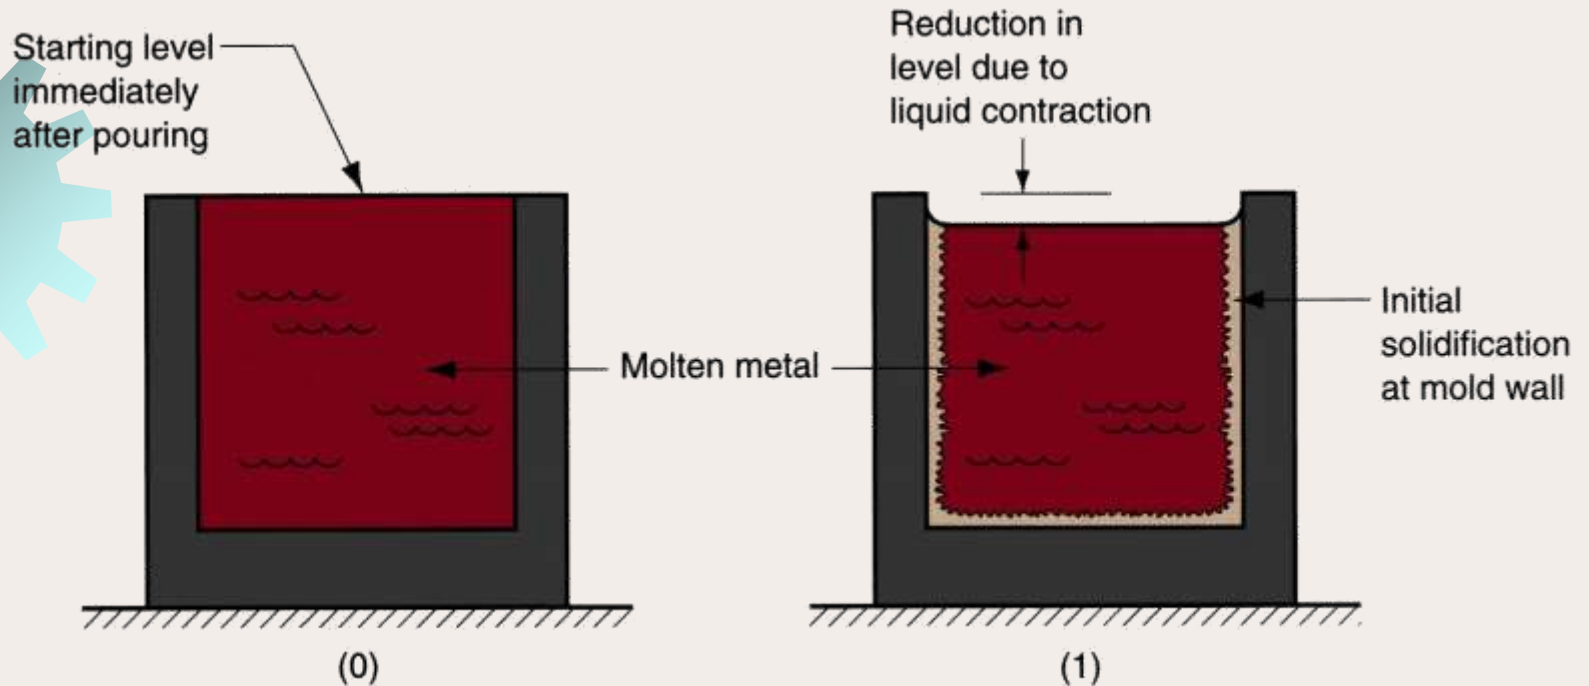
Shrinkage of a cylindrical casting during solidification and cooling: (0) starting level of molten metal immediately after pouring; (1) reduction in level caused by liquid contraction during cooling (dimensional reductions are exaggerated for clarity).
